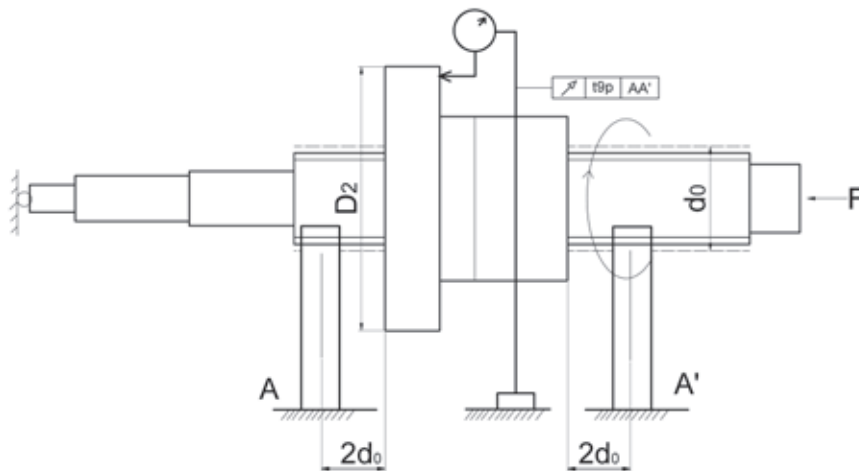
Measurement of the axial runout t_{gp} of the contact surfaces of the Ball Screw nut
